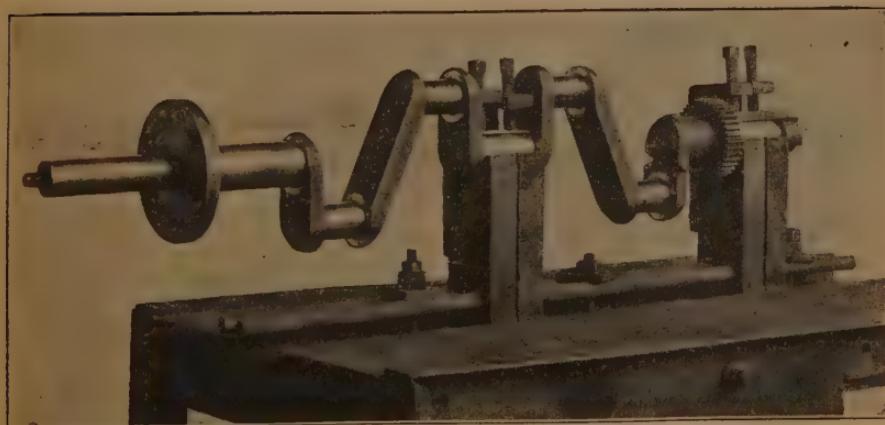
Crankshaft in Crankshaft Jig Table for Welding
